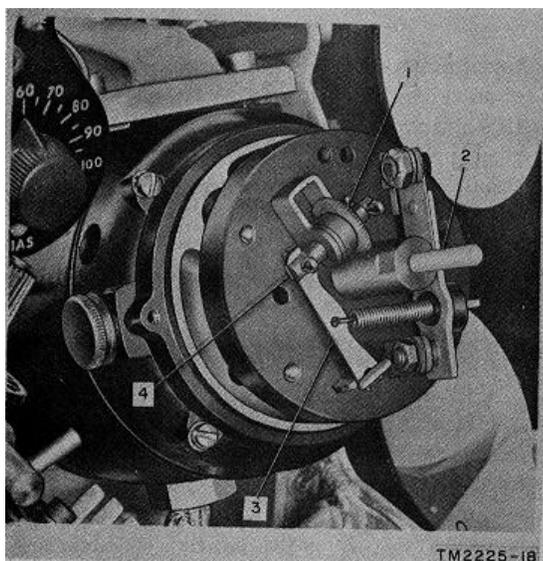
Front view of keyboard-transmitter, showing lubrication points.
